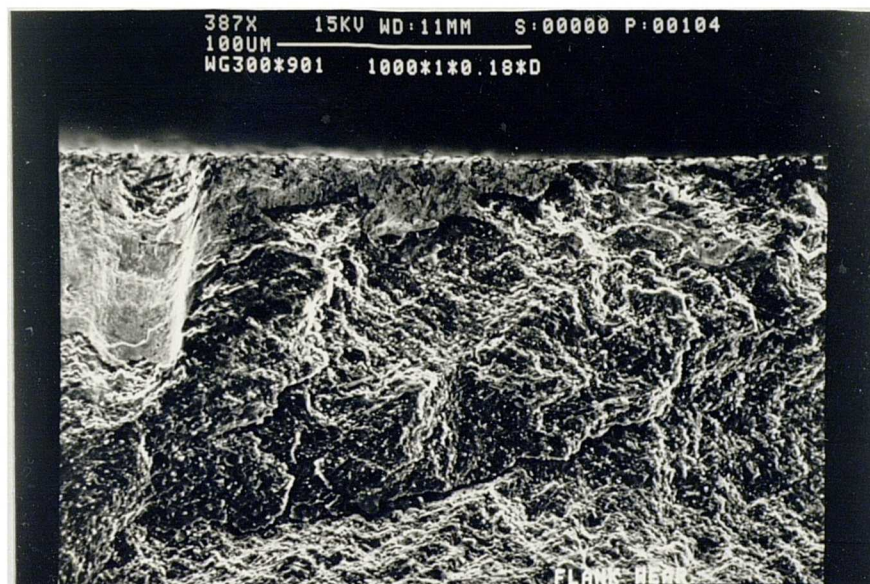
Cracks on the flank face of WG300 at V=300m/min
